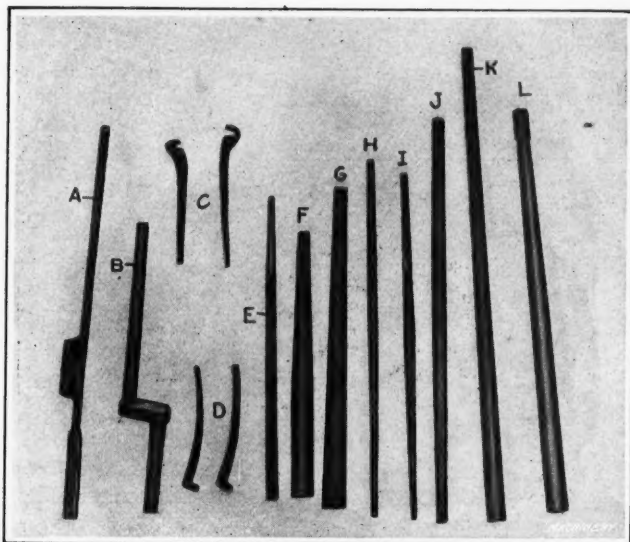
Typical Examples of Tapered Work produced between Forging Rolls
